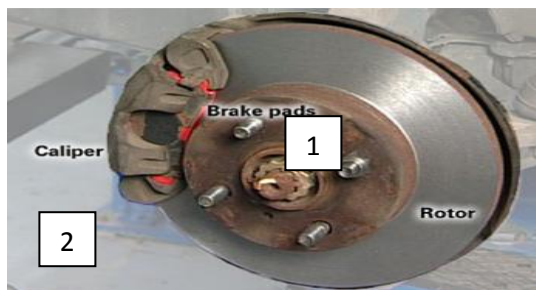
Brake system components: 1) Brake pads, 2) Caliper, 3) Rotor (cdxetextbook.com, 2010)
